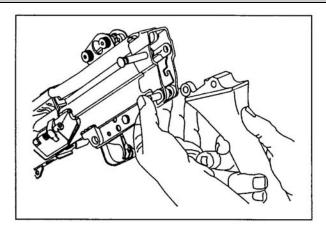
Replacement of the buttstock and shoulder assembly
